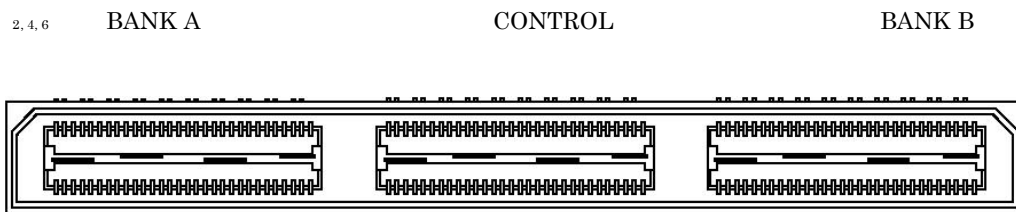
QSH-060-03-F-D-DP-A - Top View
